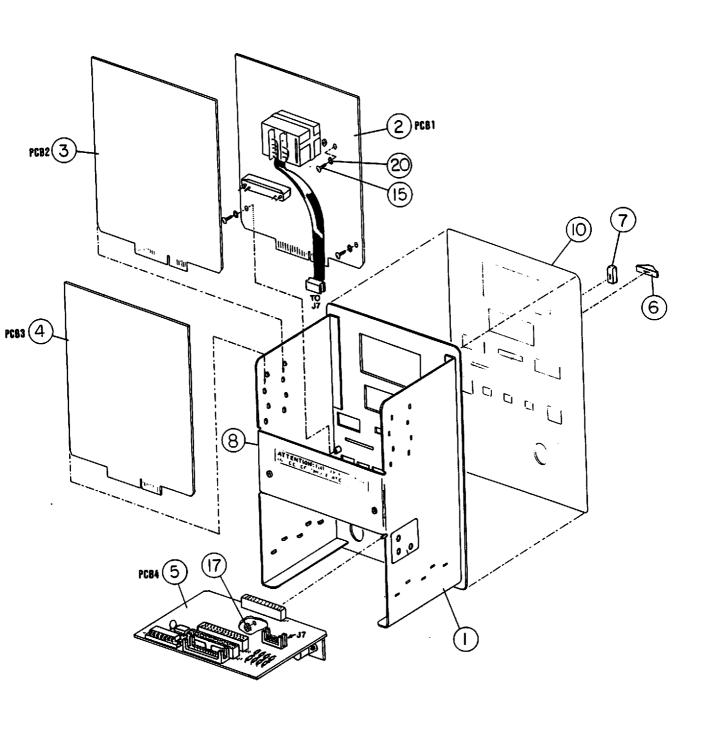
CONTROLLER ASSEMBLY, PARTS LOCATION DIAGRAM
